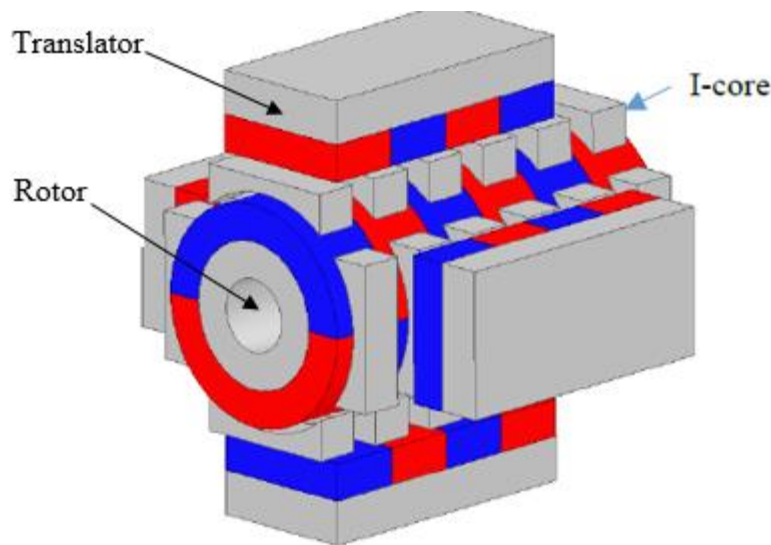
4. The final topology of the linear-to-rotary magnetic gear derived from a 2-pole VRPM machine.
